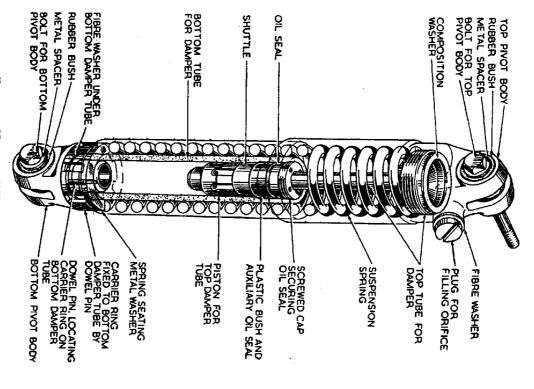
VIEW OF "TELEDRAULIC" LEG.
